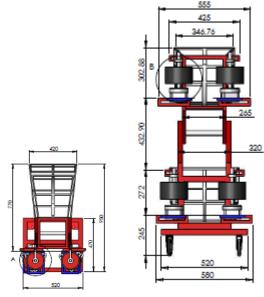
The assemble of ZPD 01 ball throwing from the top and front view
